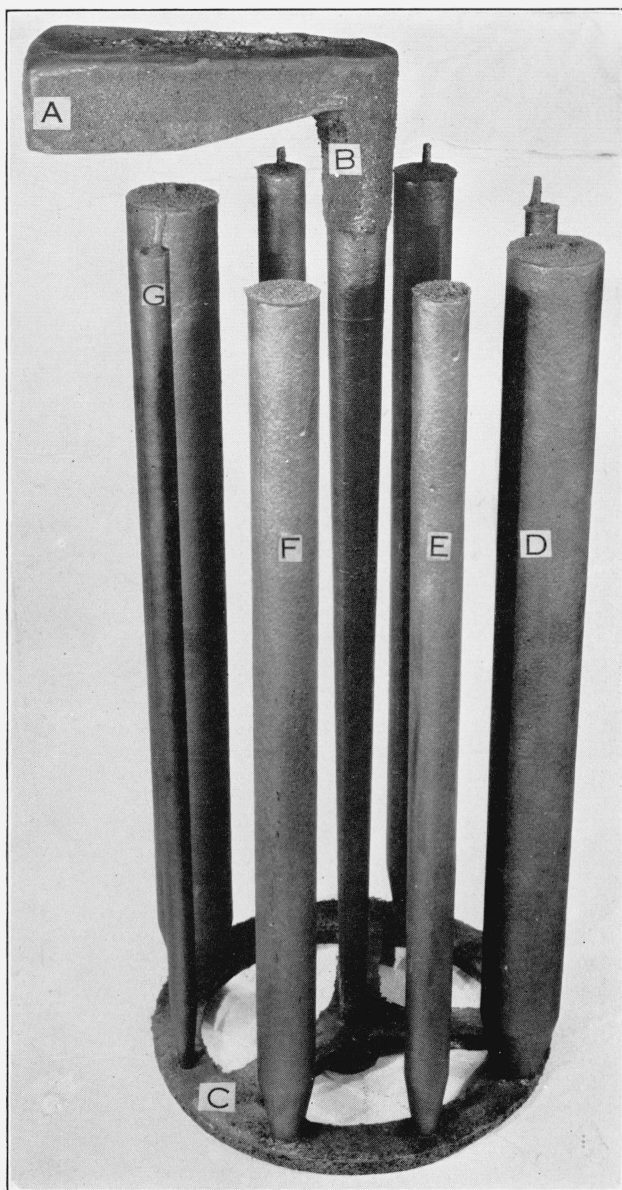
Casting showing the method of pouring bars for transverse tests.
